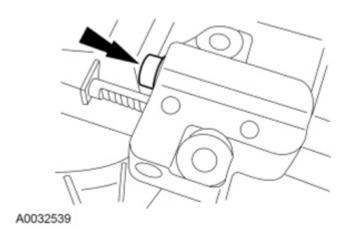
Locating Timing Chain Tensioner Arm Courtesy of FORD MOTOR CO.
